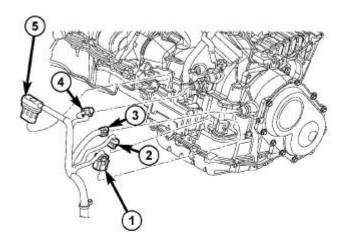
Crankshaft Position Sensor Courtesy of CHRYSLER LLC
